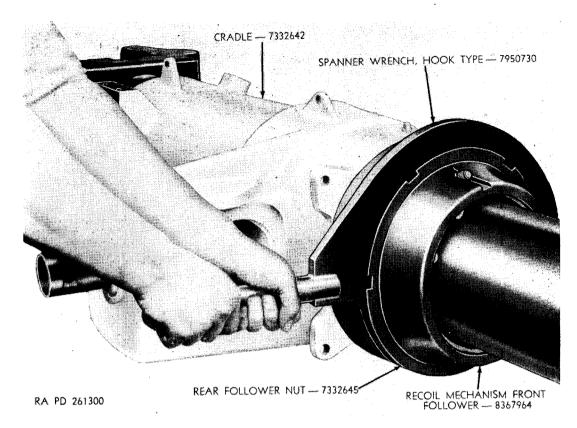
Mount M85—removing recoil mechanism front follower nut.
